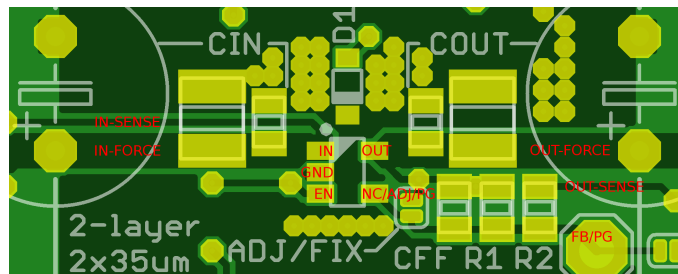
TSOP-5 Demo Board (2 layer, rev. 1) – PCB Top Layer, Zoomed, Added Signal Labels
